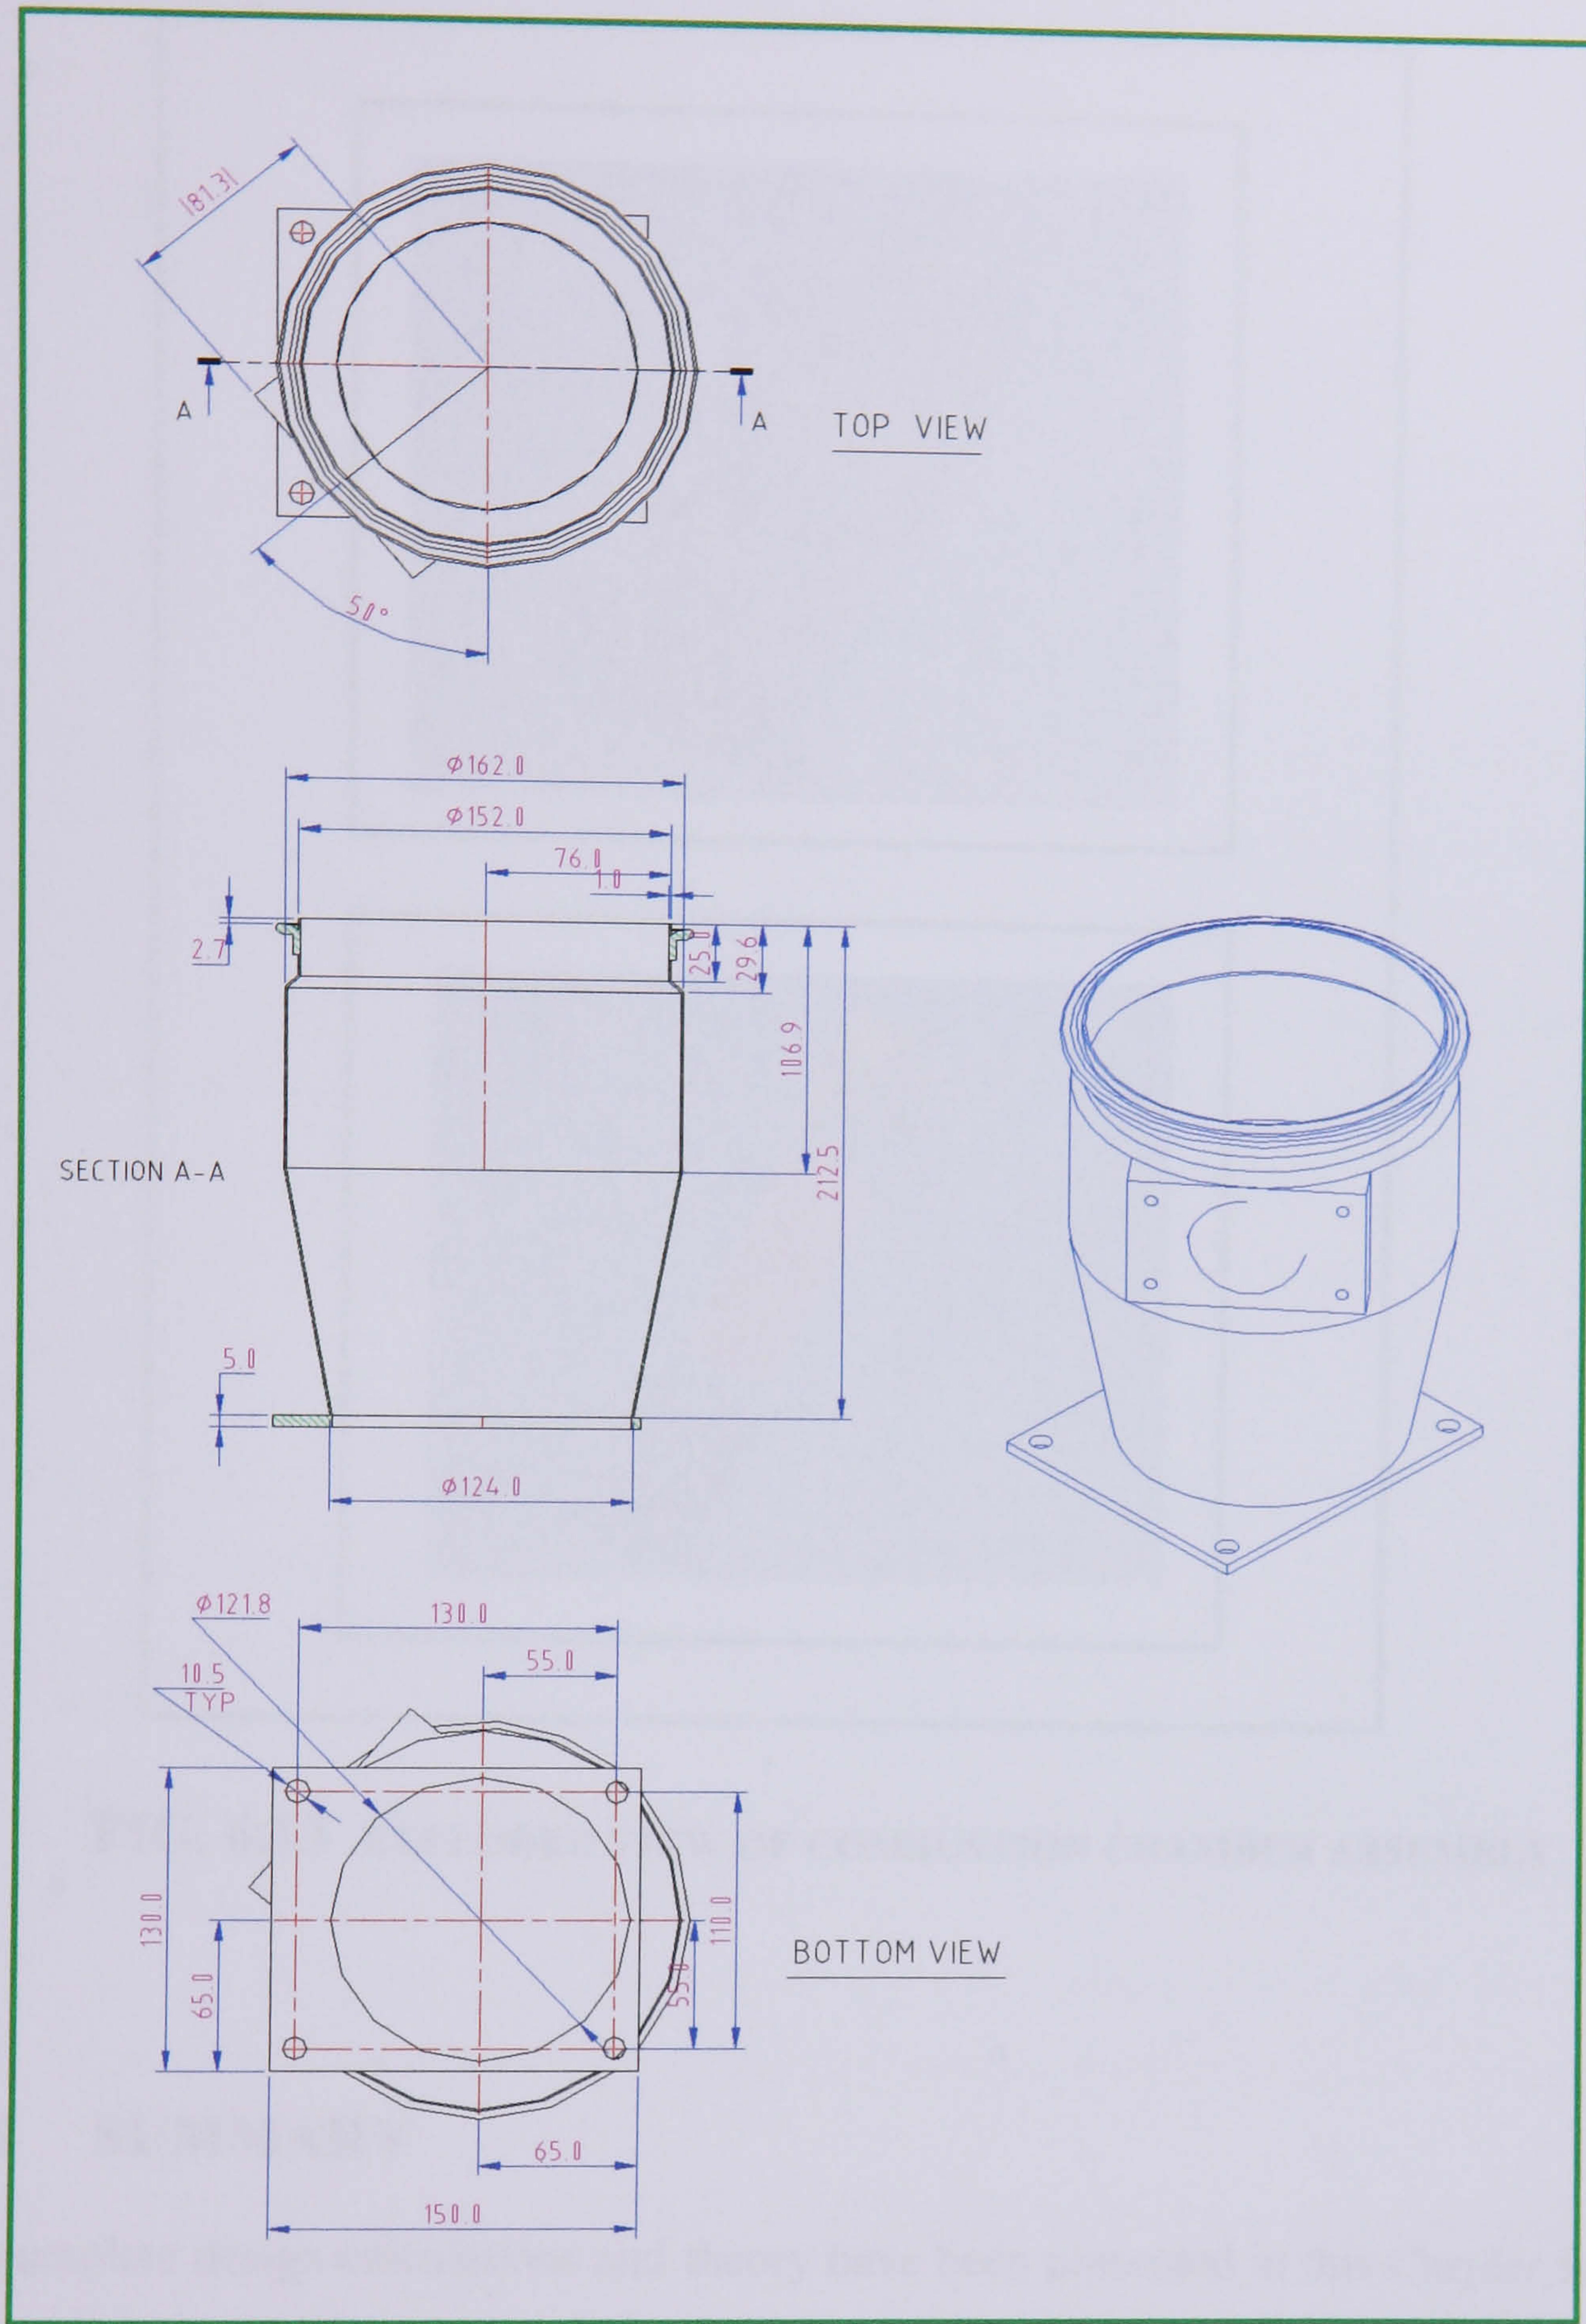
DETAILED DIMENSIONS OF THE COMBUSTION CHAMBER CASING
